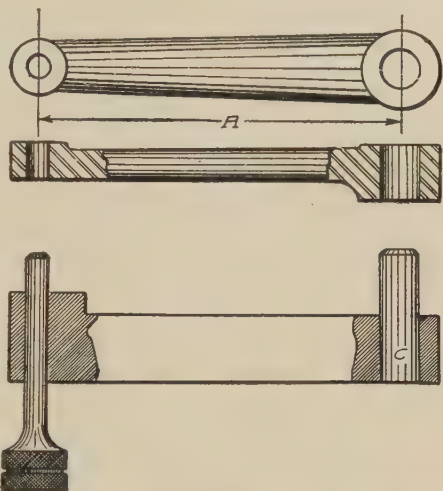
Simple Form of Locating Gage Showing Method of Use
